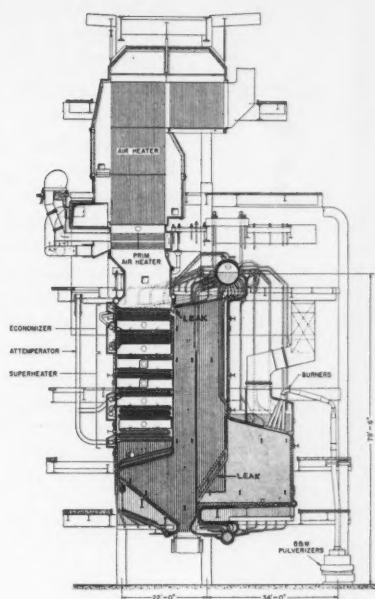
Open pass boiler slag tap ash removal (Drawing courtesy of The Babcock & Wilcox Company).
